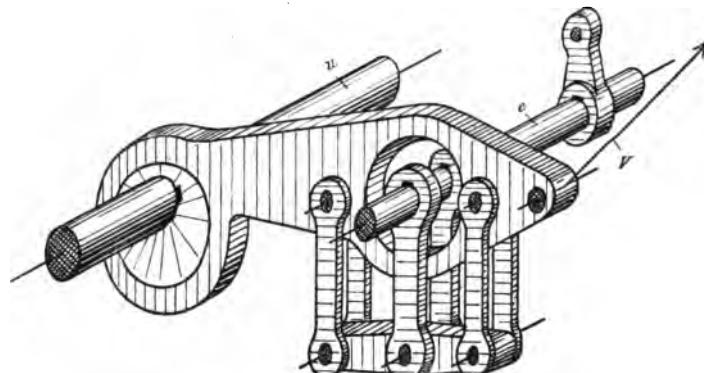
(Note.— $u$  = valve shaft;  $e$  = reversing shaft;  $V$  = to the valve.)
